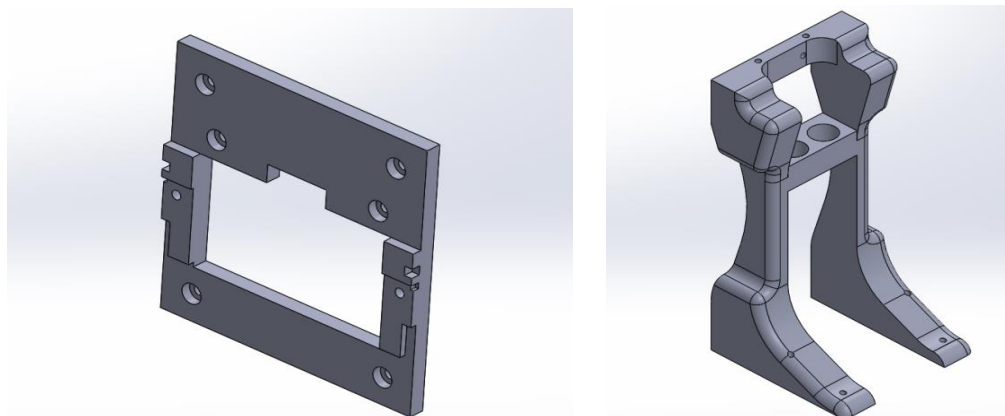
Rail plate and stand to adapt the printer to support bioprinting setups.
